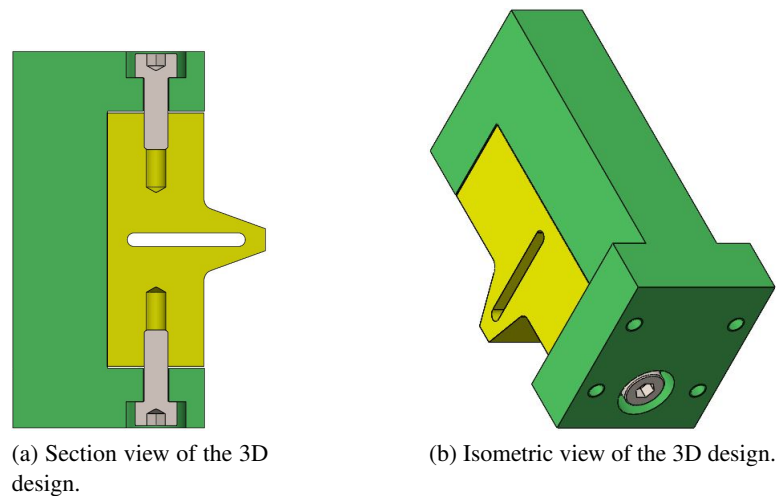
First 3D design of the hybrid polymer gear tooth base.
